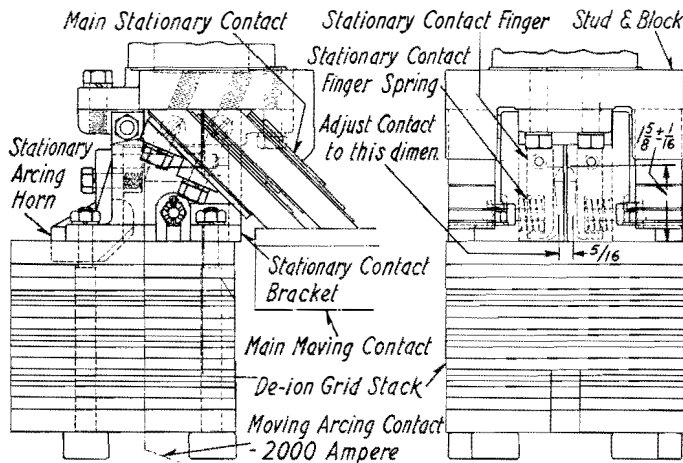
"DE-ION GRID" CONTACT ASSEMBLY
